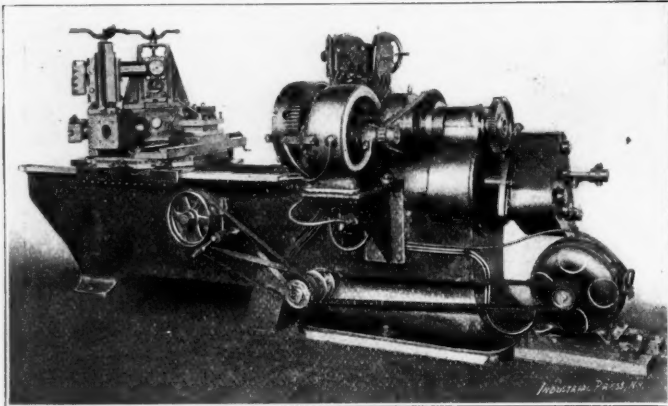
Renold Chain Drive from Crocker-Wheeler Motor to American Turret Lathe.
